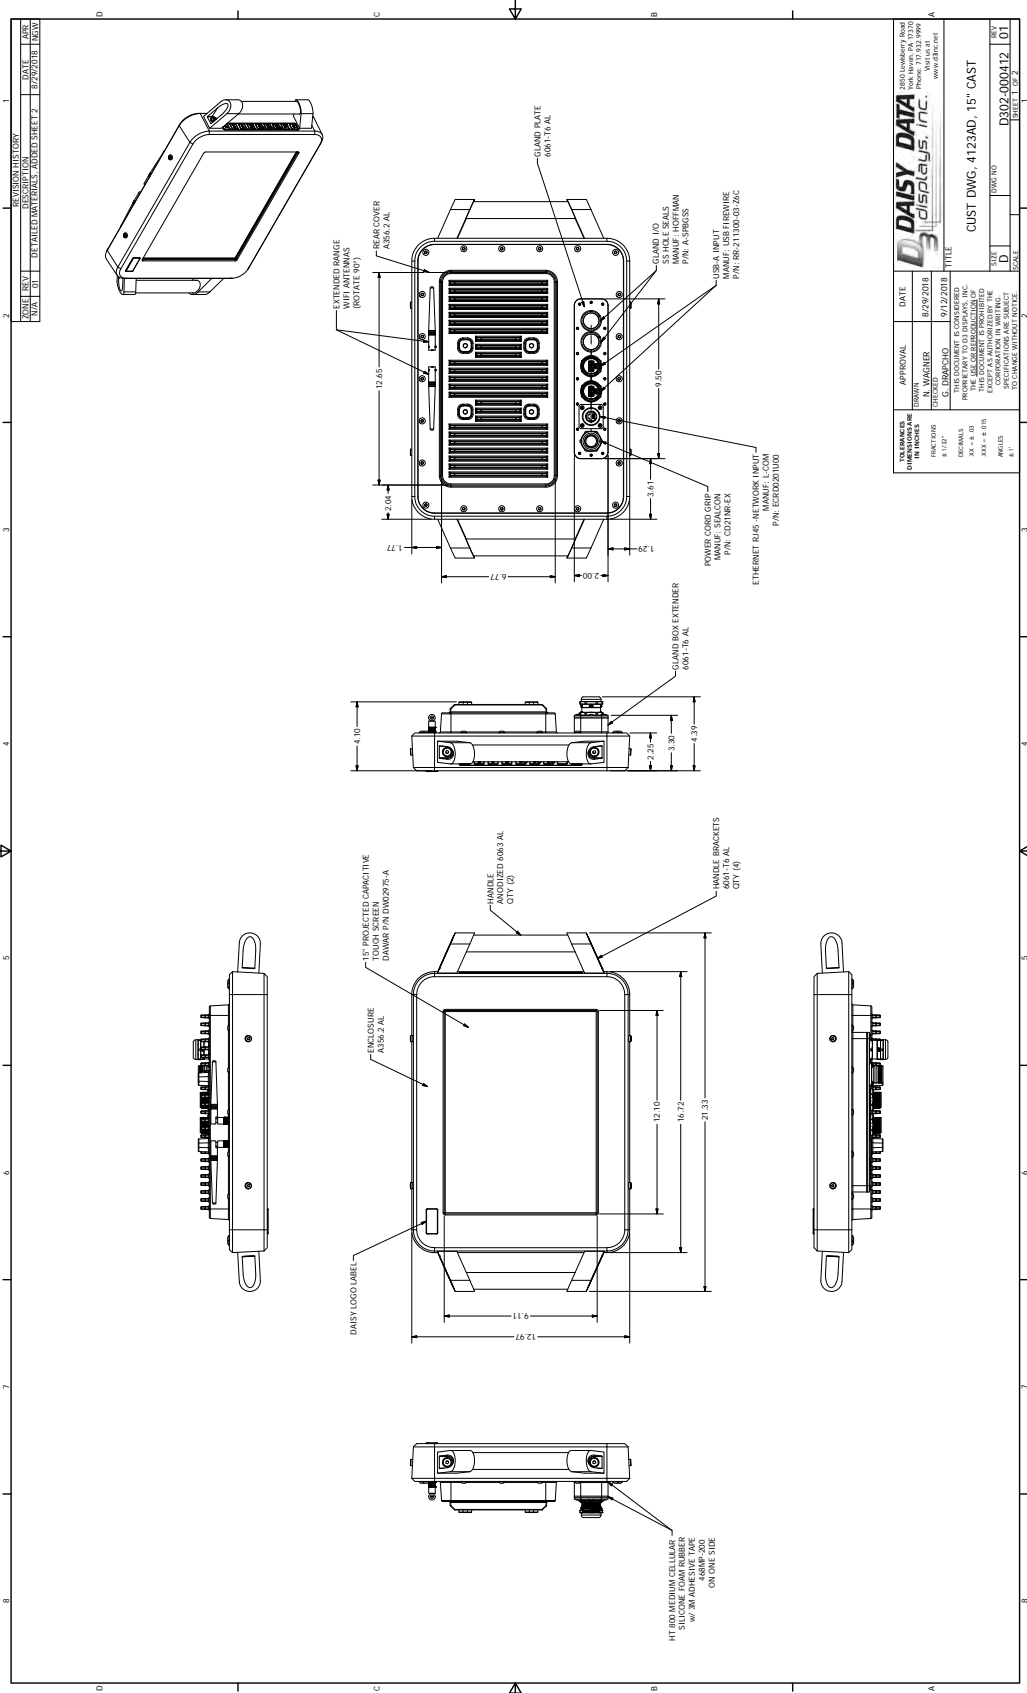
Model 4123AD Mechanical Drawing (1 of 2)
